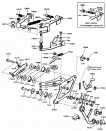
EXPLODED VIEW OF A MECHANICAL ASSEMBLY
